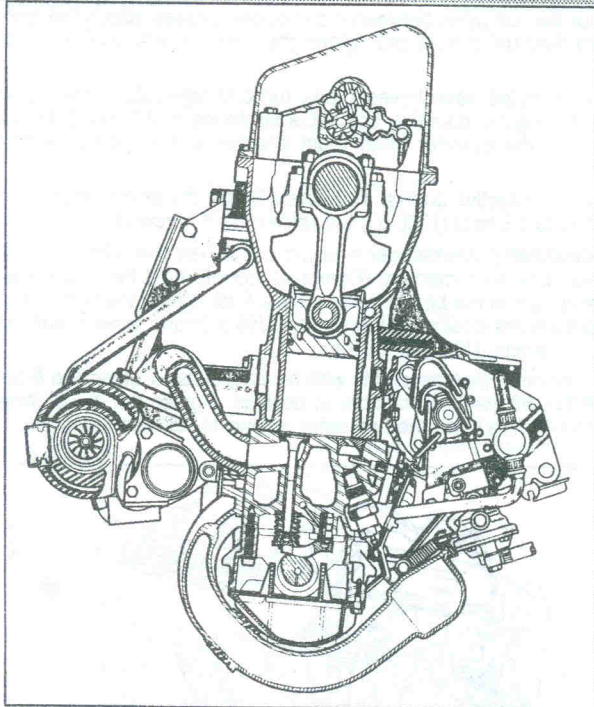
Sectional view of the XUD11 turbo diesel engine.
